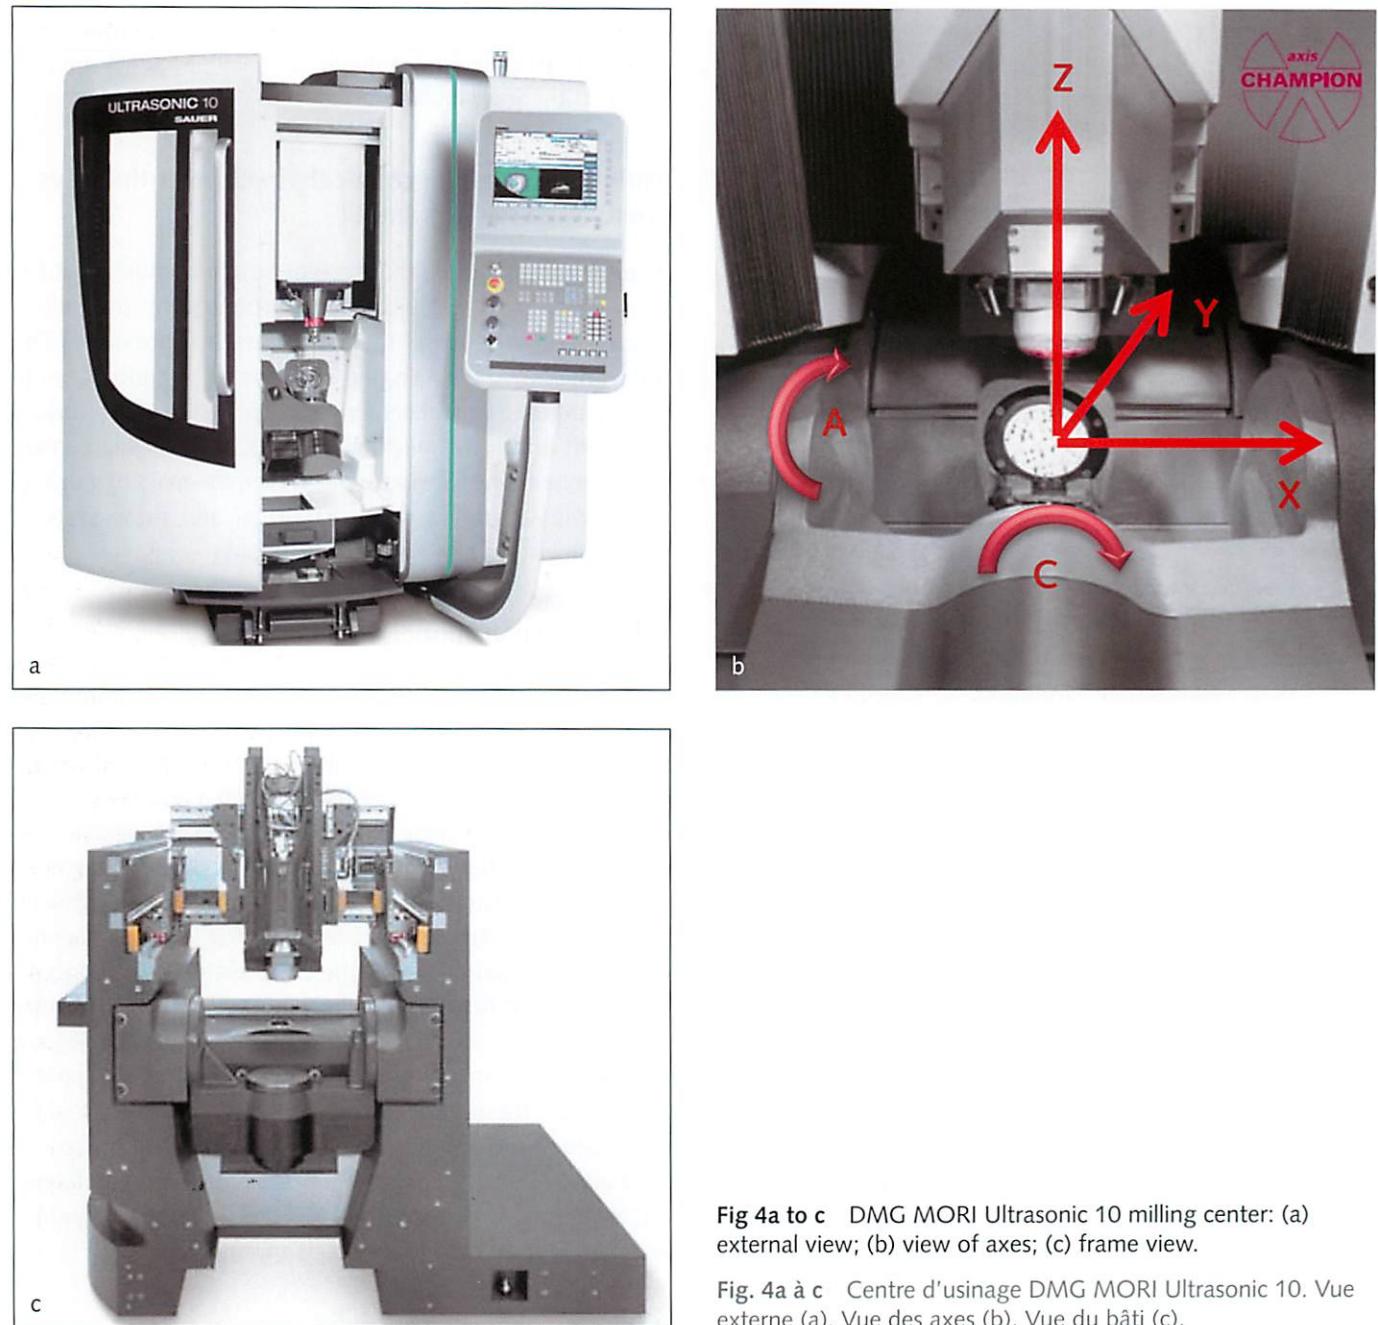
to c DMG MORI Ultrasonic 10 milling center: (a) external view; (b) view of axes; (c) frame view.
